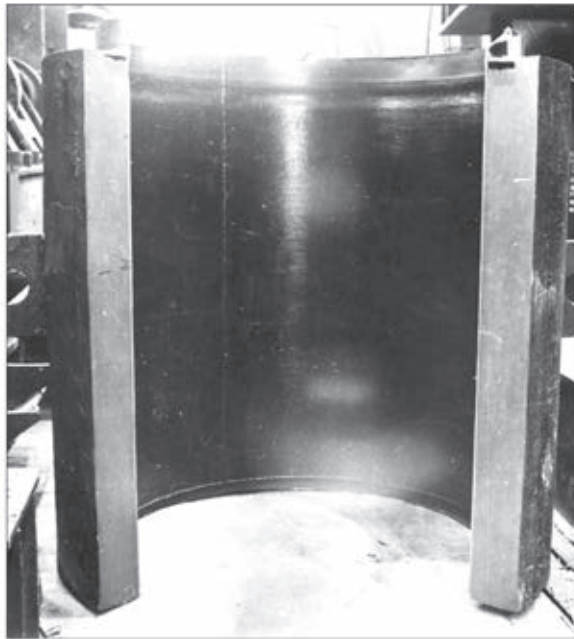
Shell is thick-walled vessel with a plating of stainless steel sheet, solder the WUA.
